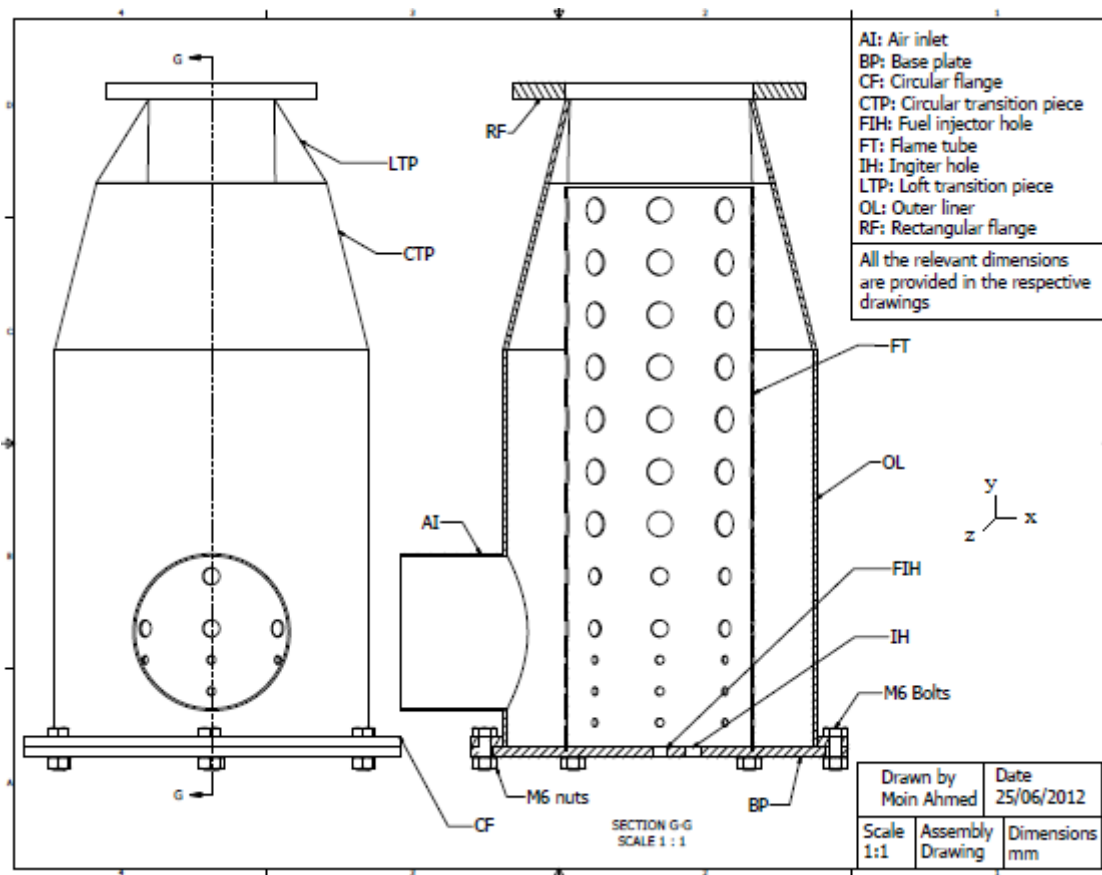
Final assembly drawing of the SEC (re-scaled)
